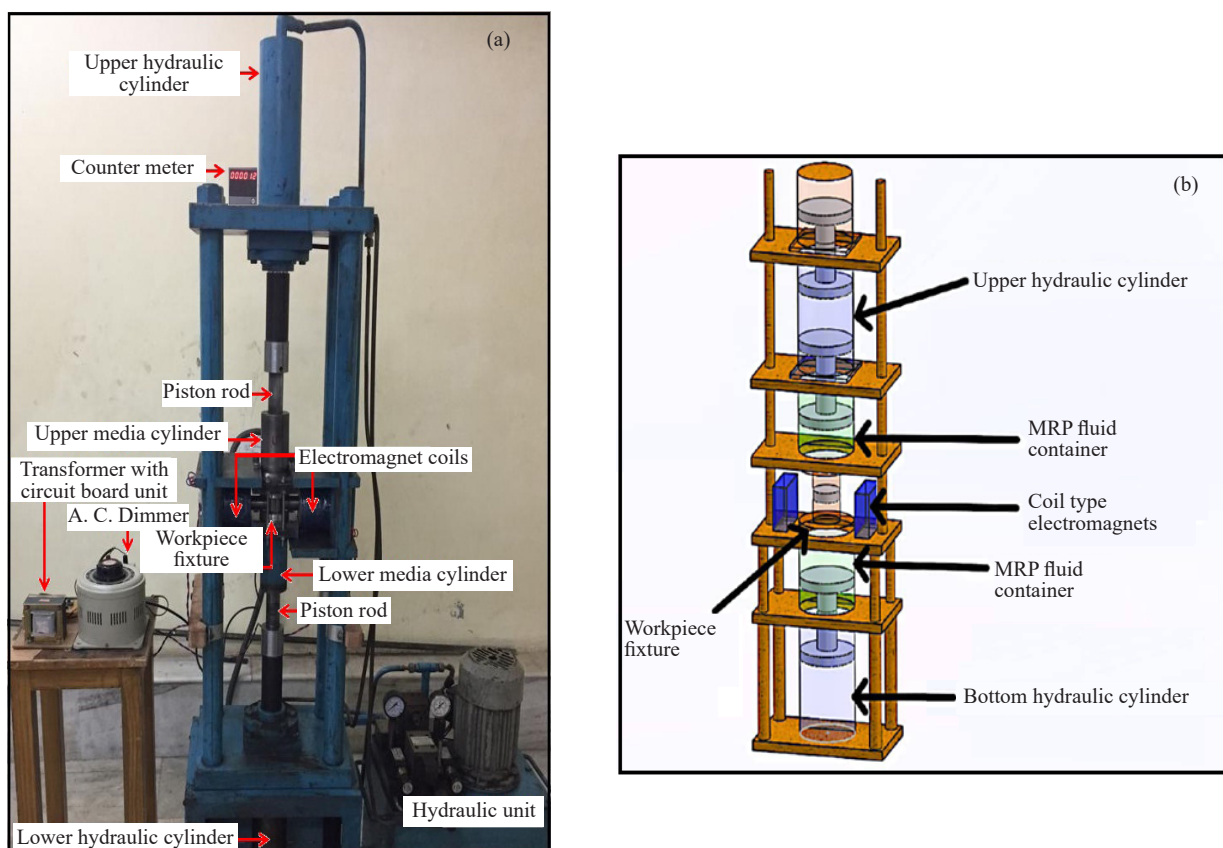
(a) Pictorial view of MAFM set-up. (b) CAD model shows the mechanism of MAFM
